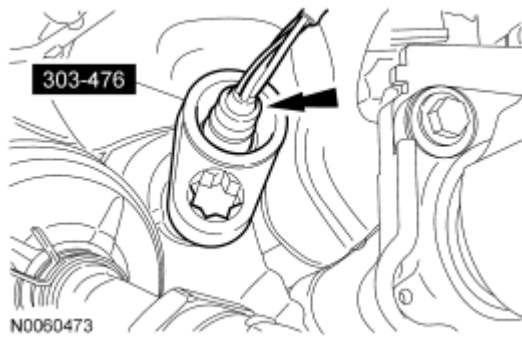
Identifying RH HO2S & Special Tool (303-476)
